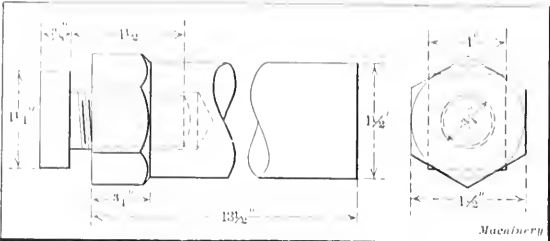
Detail of the Driver shown in Operation in Fig. 6
